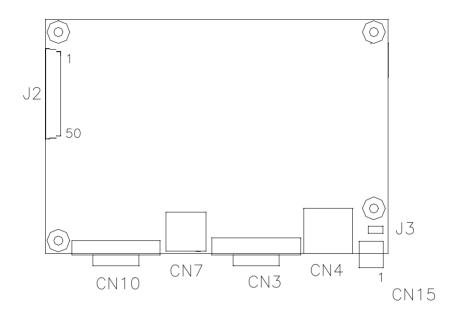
Board layout: location of Pin 1 of J2 (component side)
